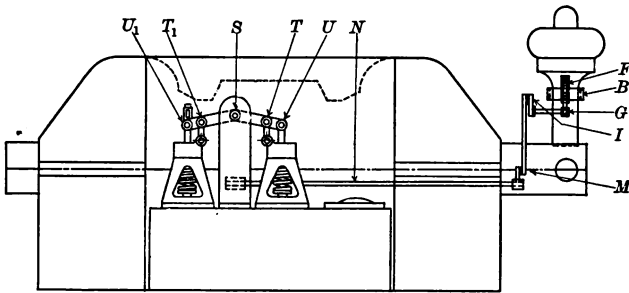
GENERAL ARRANGEMENT OF OIL-OPERATED RELAY GEAR AND TURBINE CASING
